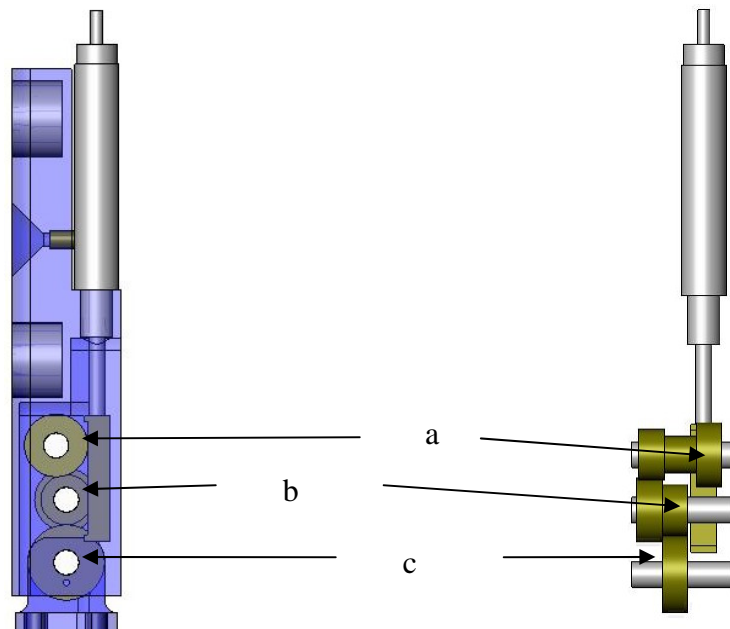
Assembly of gear-train. One set of 16-20 tooth gears (a) was driven directly by the rack connected to the cylinder. A second set of 16-20 tooth gears (b) drove a 24 tooth gear (c) which is connected to the upper portion of the first link (not shown).
